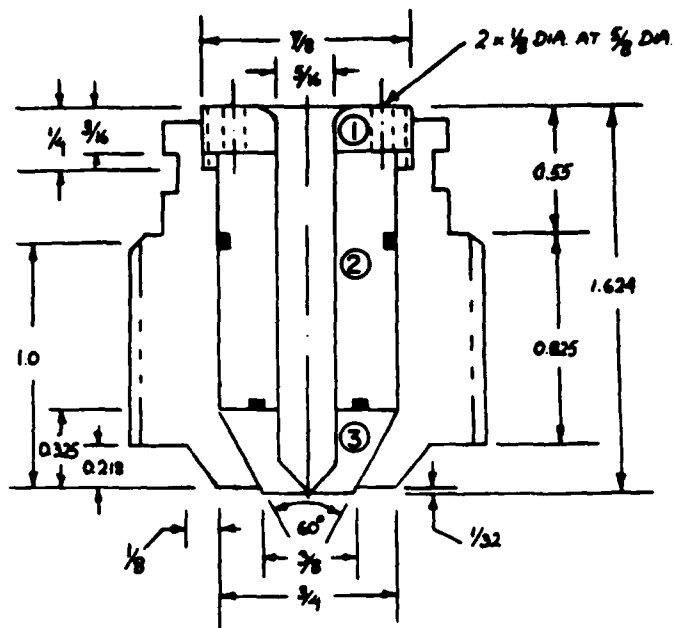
Details of nozzle holder: 1. retaining ring; 2. sealing ring; 3. nozzle insert - dimensions in inches
